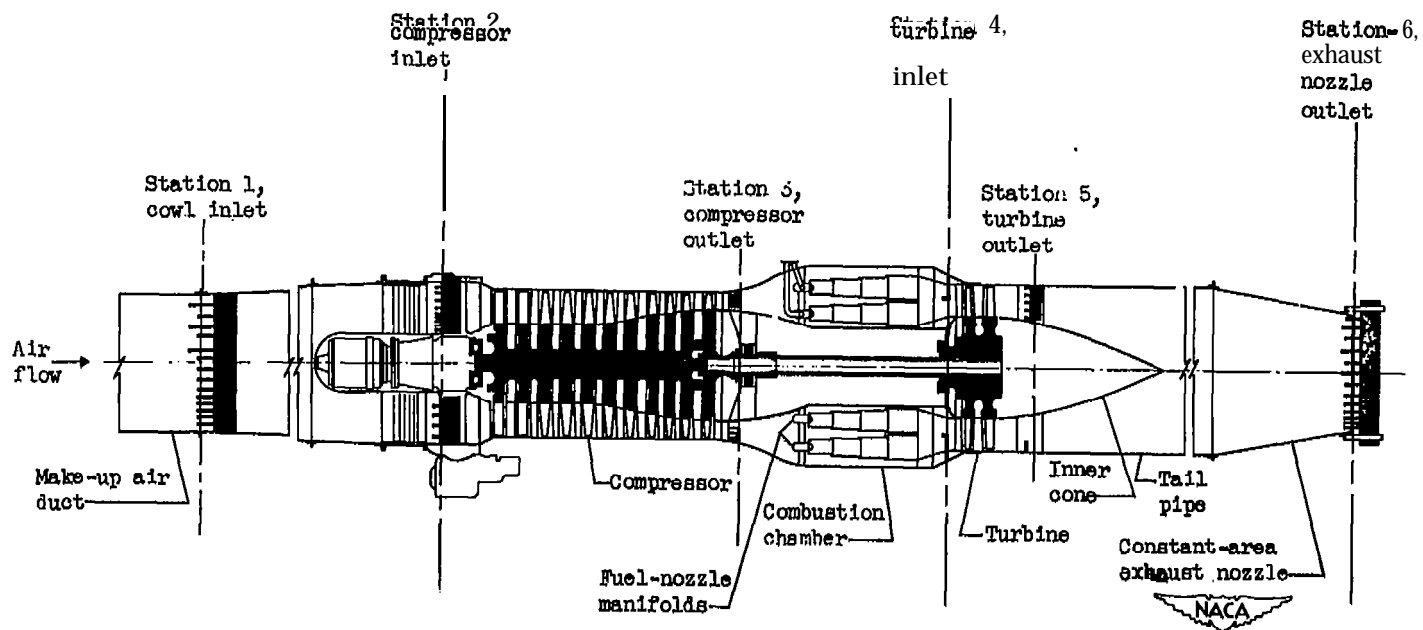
Cross section of turbojet installation showing relation of component parts and measuring stations in engine.
